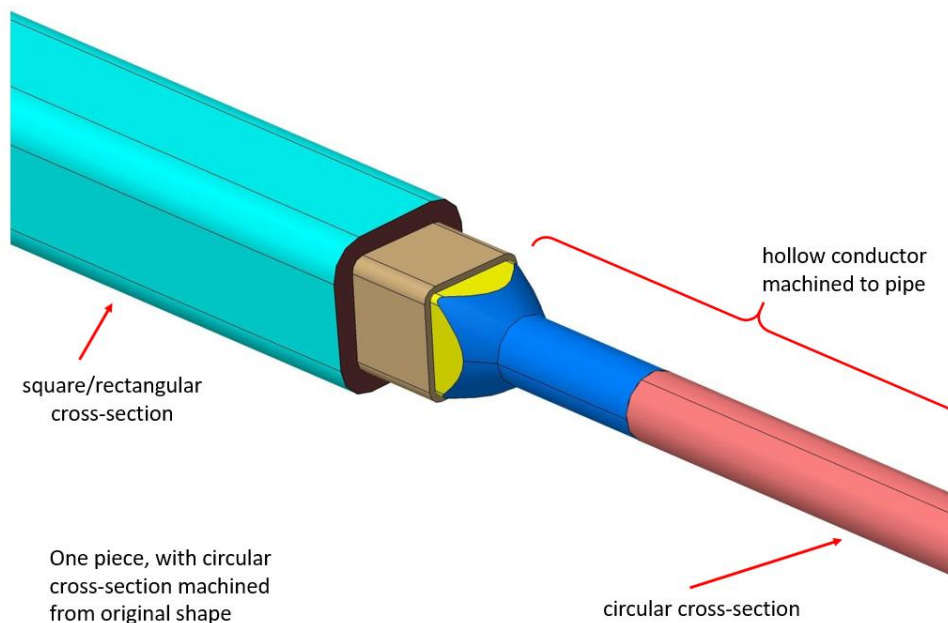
Illustration of the square/rectangular shape of the hollow conductor machined to the pipe - circular cross-section shape.
